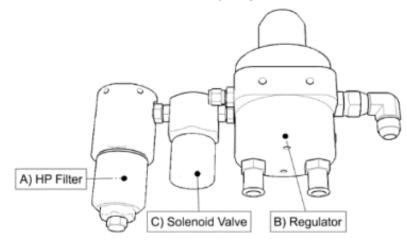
Typical HP filter (A), supply solenoid valve (C), and pressure regulator (B) subassembly.
